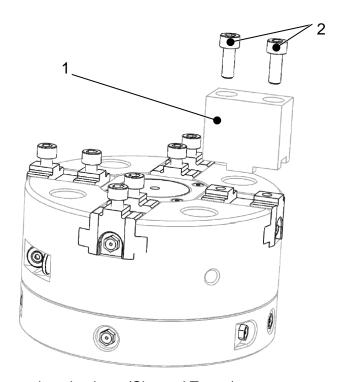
Mount clamping jaws (Slot and Tenon)
